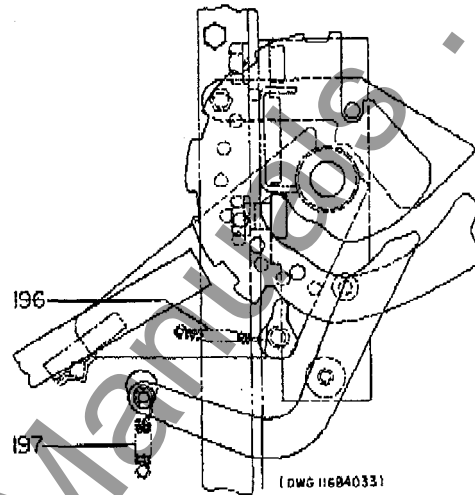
Drawout racking mechanism, (Ref. No. 195)
